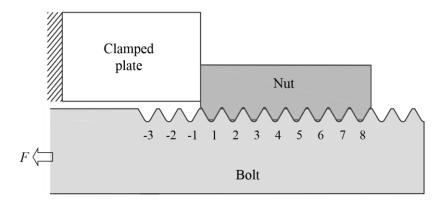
Bolt-nut specimen in fatigue experiment (dimensions in mm)
